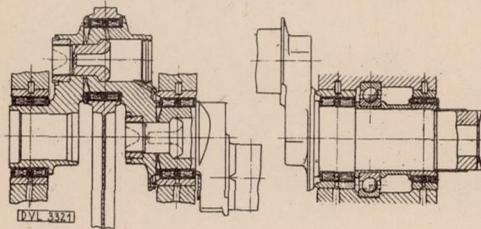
Built-up Hirth-type crankshaft of a 12-cylinder aircraft engine.
